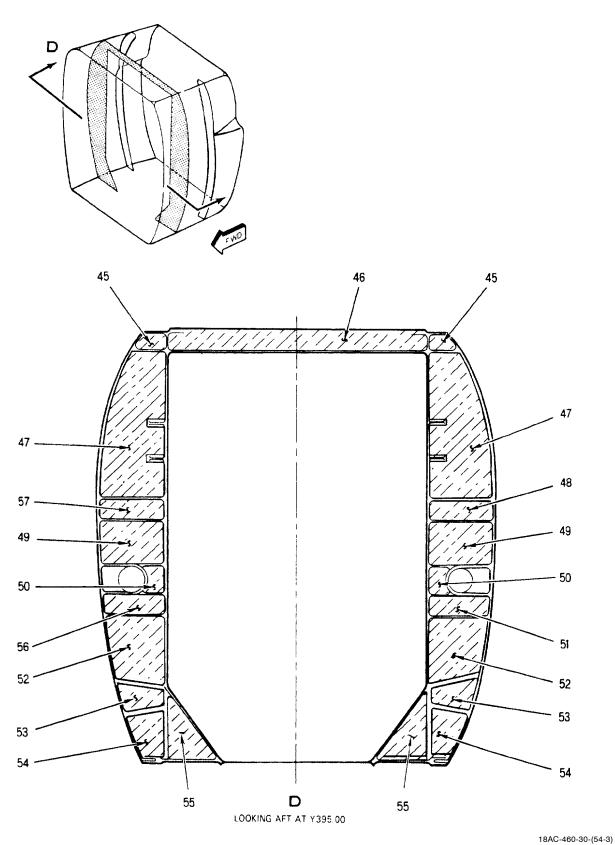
No. 2 Fuel Tank Cavity Foam Filler - 161742 AND UP (Sheet 3)
